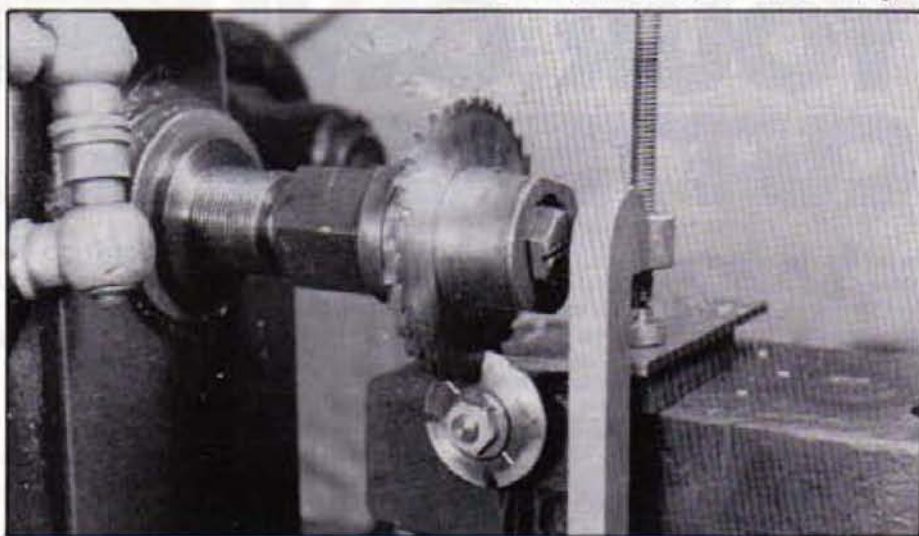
a piece of steel is clamped in contact with the back of a tooth.
